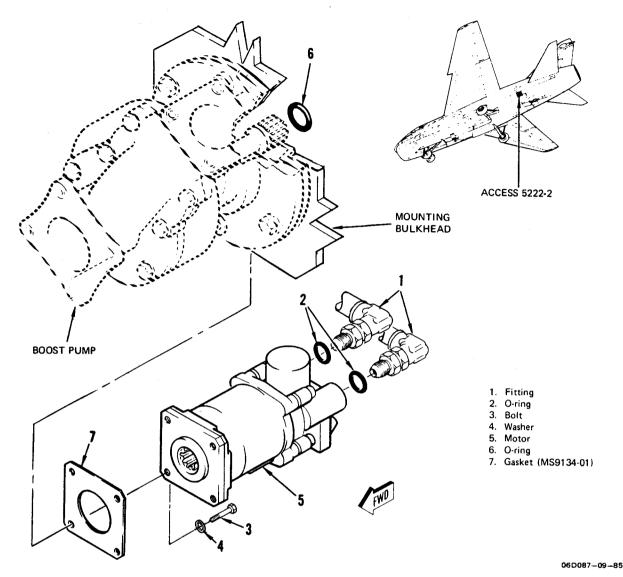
Removal and Installation; Fuel Boost Pump Hydraulic Motor
